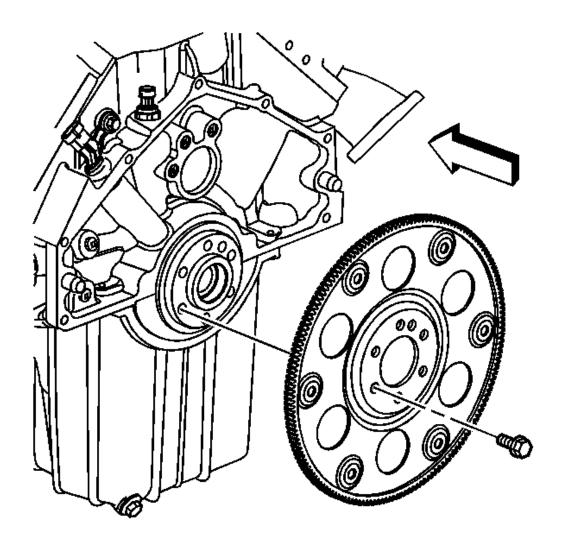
View Of Engine Flywheel & Bolts Courtesy of GENERAL MOTORS CORP.
